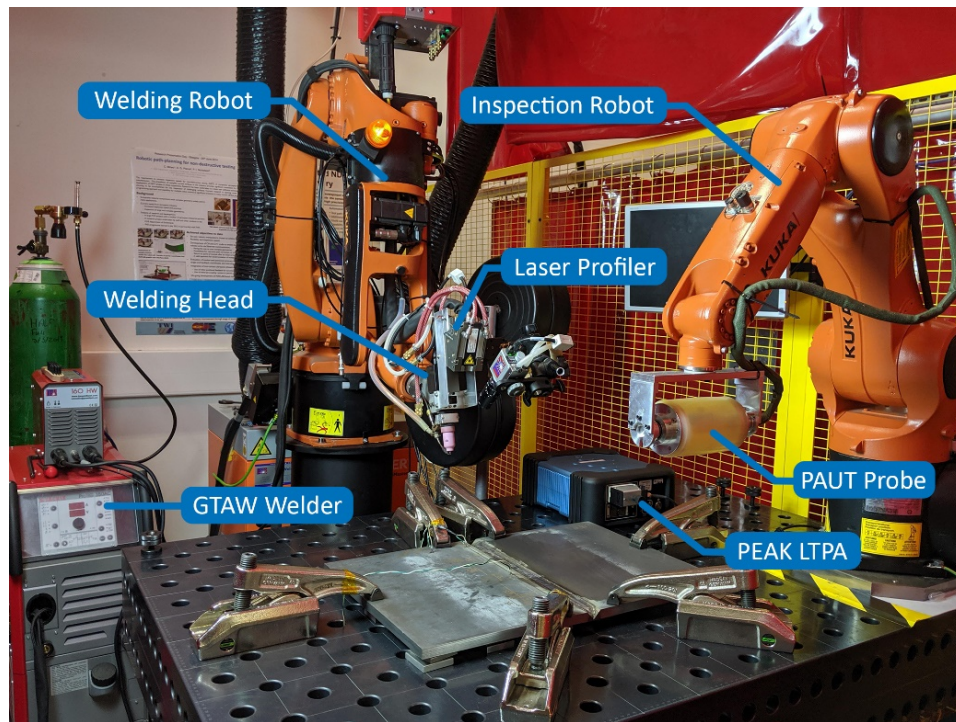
Novel sensor-enabled multi-robot welding and in-process NDE system.
